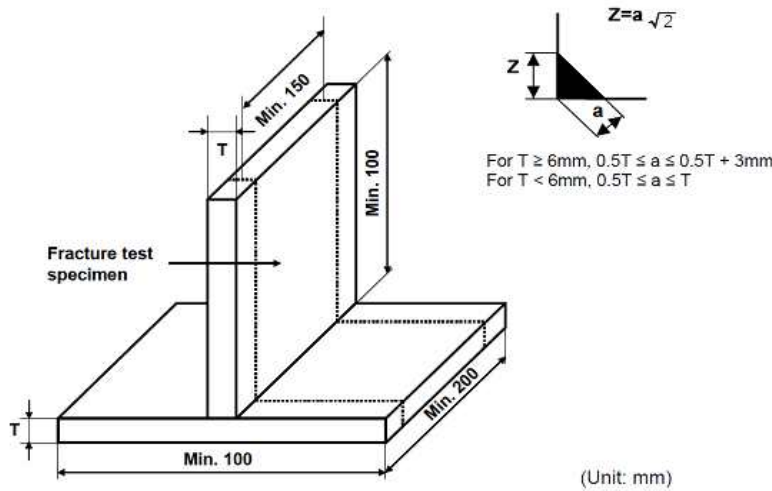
Dimensions and types of test assembly for fillet welds
